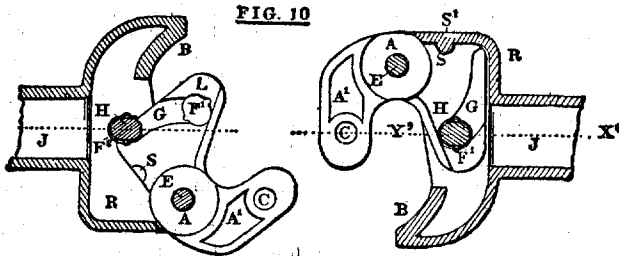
is a horizontal longitudinal section of two opposing draw-heads, with coupling-heads attached, about to make a coupling, with left-hand coupling-head unlocked and open, and the right-hand coupling-head closed and locked. The same letters of reference refer to the same parts throughout.
